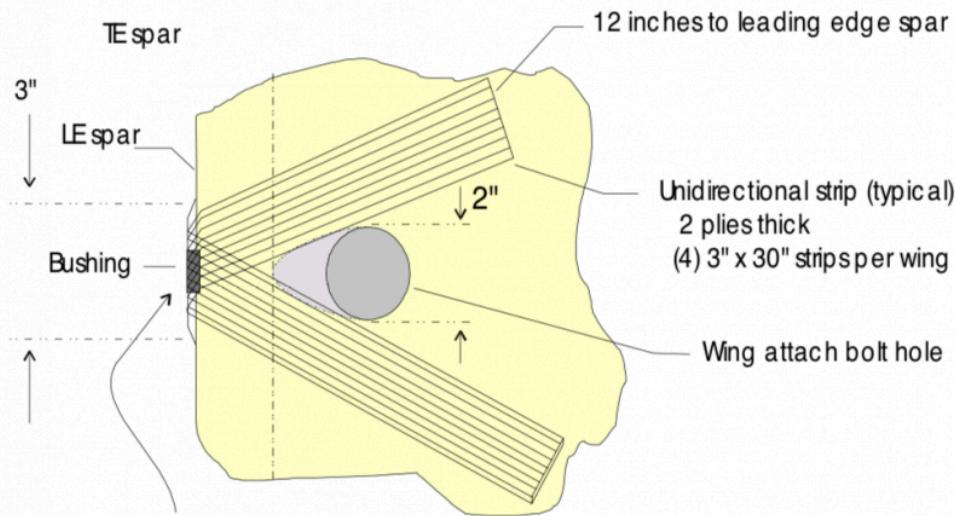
Wing Attach Bolt Hole Detail - Side View
